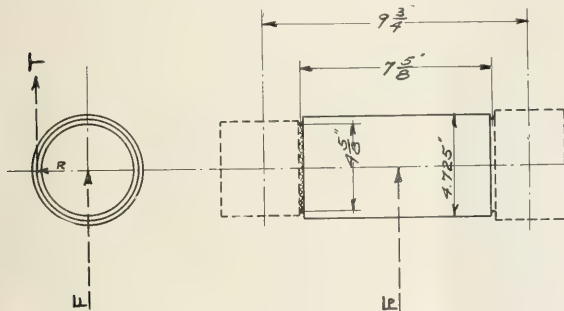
Drawing illustrating the fracture of piston pin in diesel engine.
